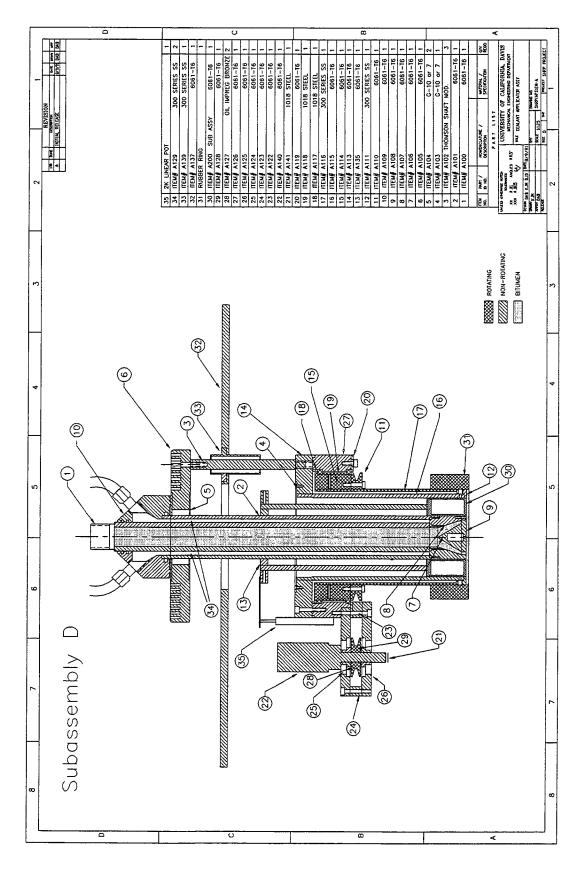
Cross-Sectional View Of Sealant Applicator
